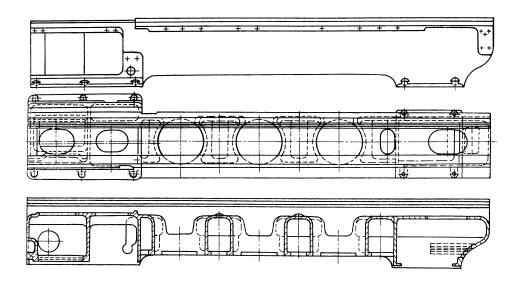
Bed of an engine lathe manufactured by the Krasny Proletary Plant
